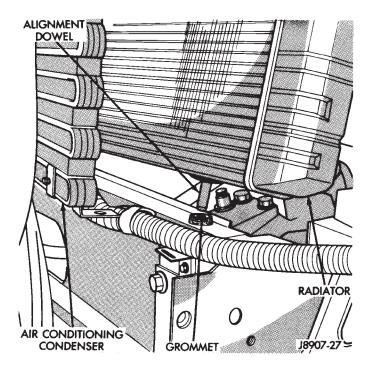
Radiator Installation—XJ Models with 4.0L 6-Cylinder Engine
